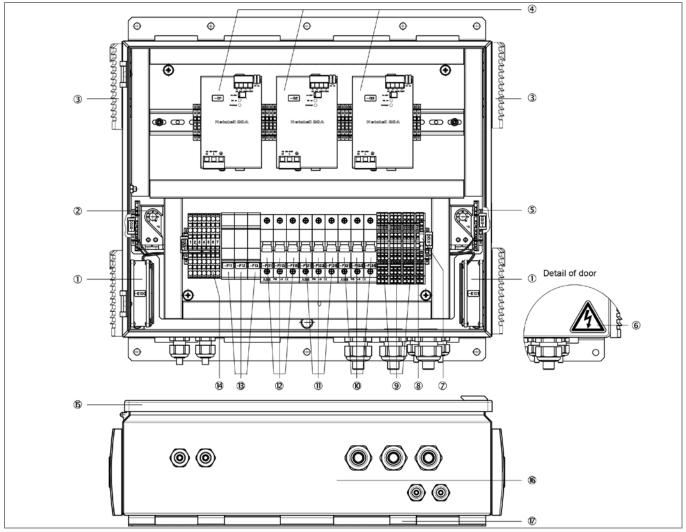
MSC800-3600 device view (internal view with open door and view from below)
